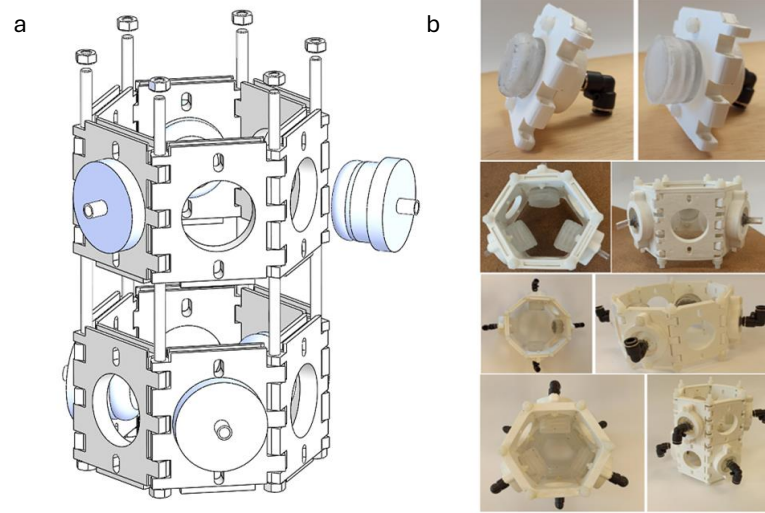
Modules, assembly process and various configurations. (a) Assembly of the modules. (b) Fully assembled modules and several soft grippers configurations.
